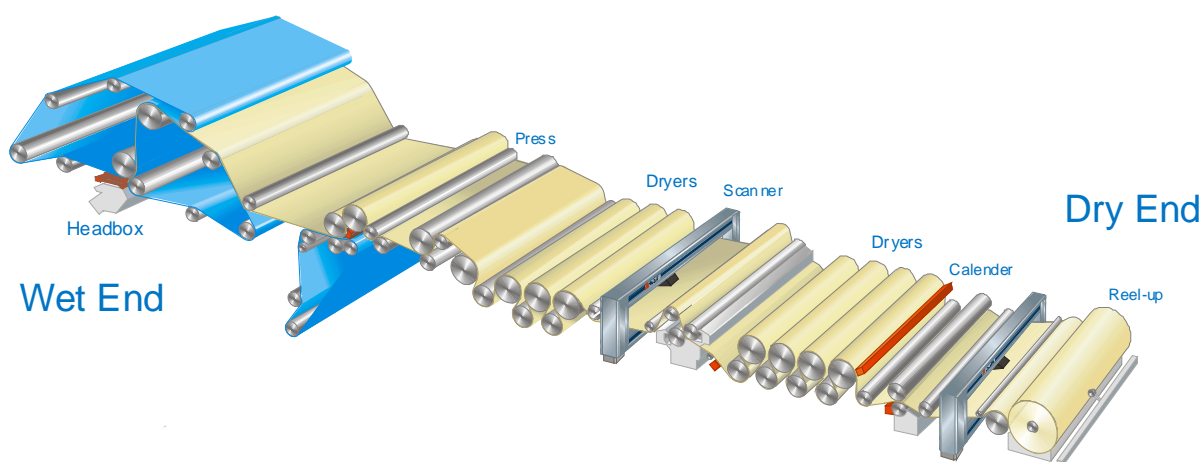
Wide view of modern paper machine (Courtesy of Metso Paper).
